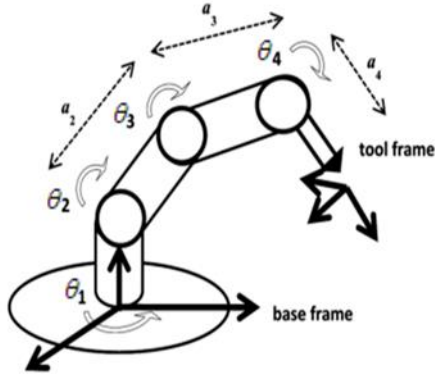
Schematic Model of the Welding Manipulator
